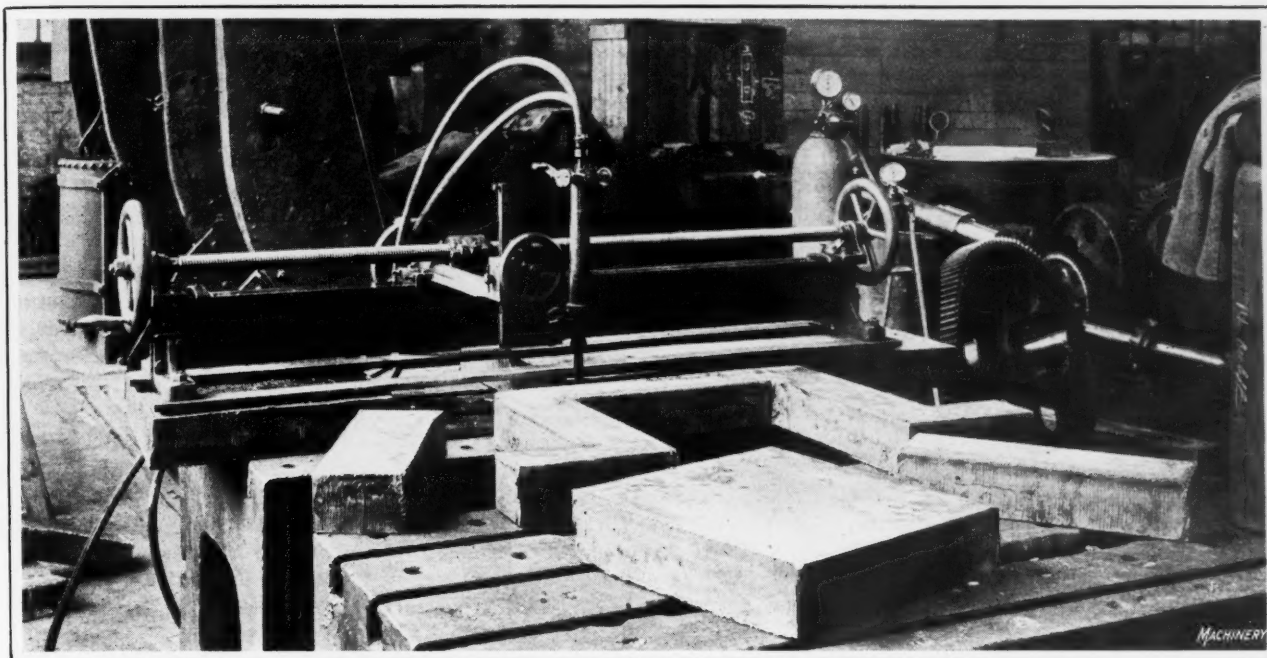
Cutting Roll Housings from Steel Slabs with Oxy-acetylene Blowpipe in Conjunction with a "Straight-line" Cutting Machine
